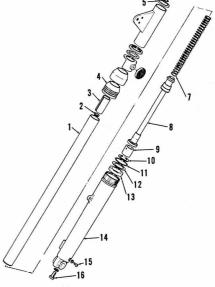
Exploded view of late DT-1 front suspension unit. Early models had similar construction. Holding bolt (16) must be removed to disassemble unit.
